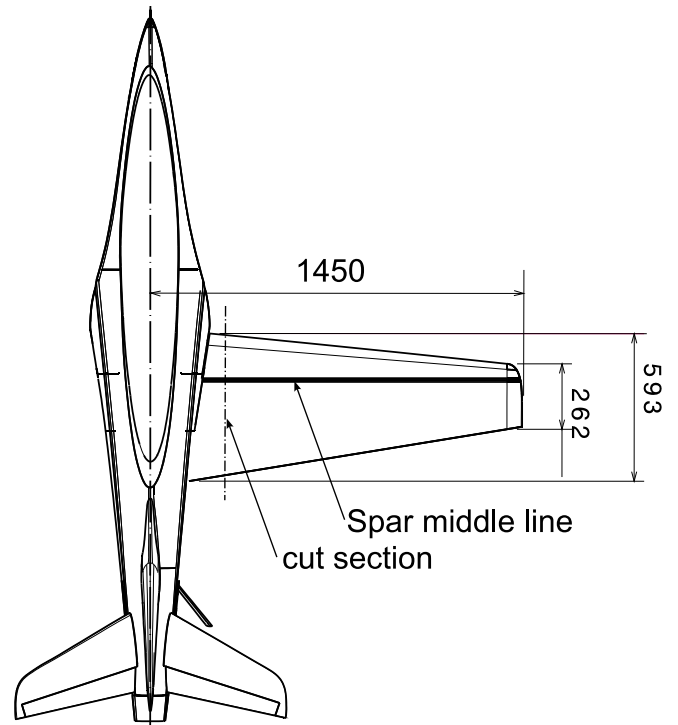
CAD MODEL OF THE WING PLANFORM WITH THE SELECTED SECTION DASHED DIMENSIONS IN MILLIMETERS
